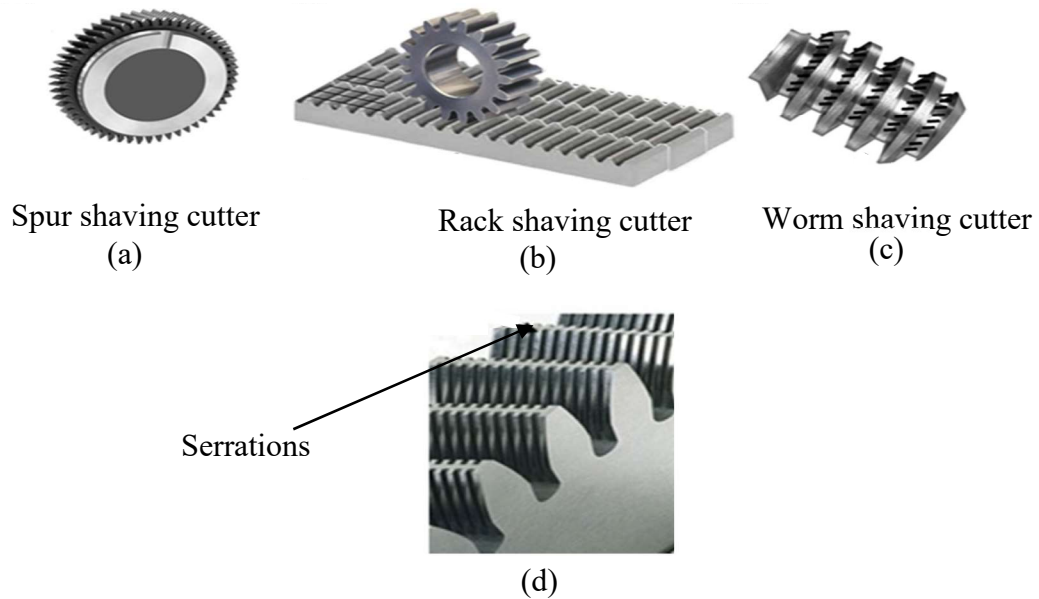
Shaving cutter based on geometry (a) spur shaving cutter, (b) Rack shaving cutter, (c) worm shaving cutter and (d) Serration at the face of gear teeth [6]
